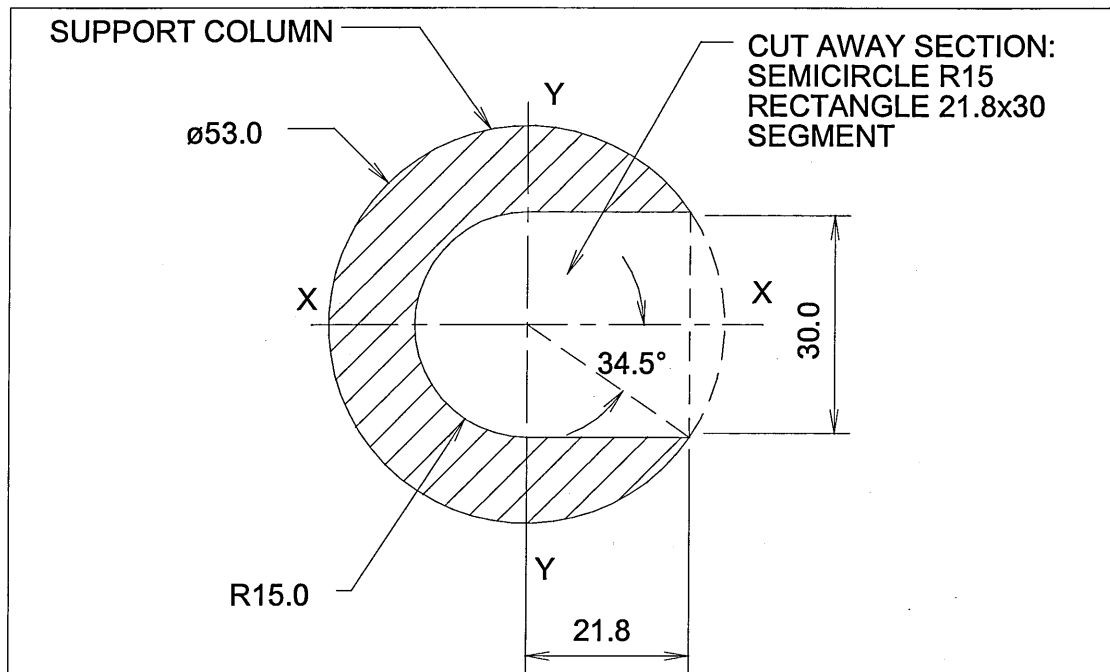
THE CROSS SECTIONAL SHAPE OF THE SUPPORT COLUMN AWAY FROM THE BEARING ASSEMBLIES
